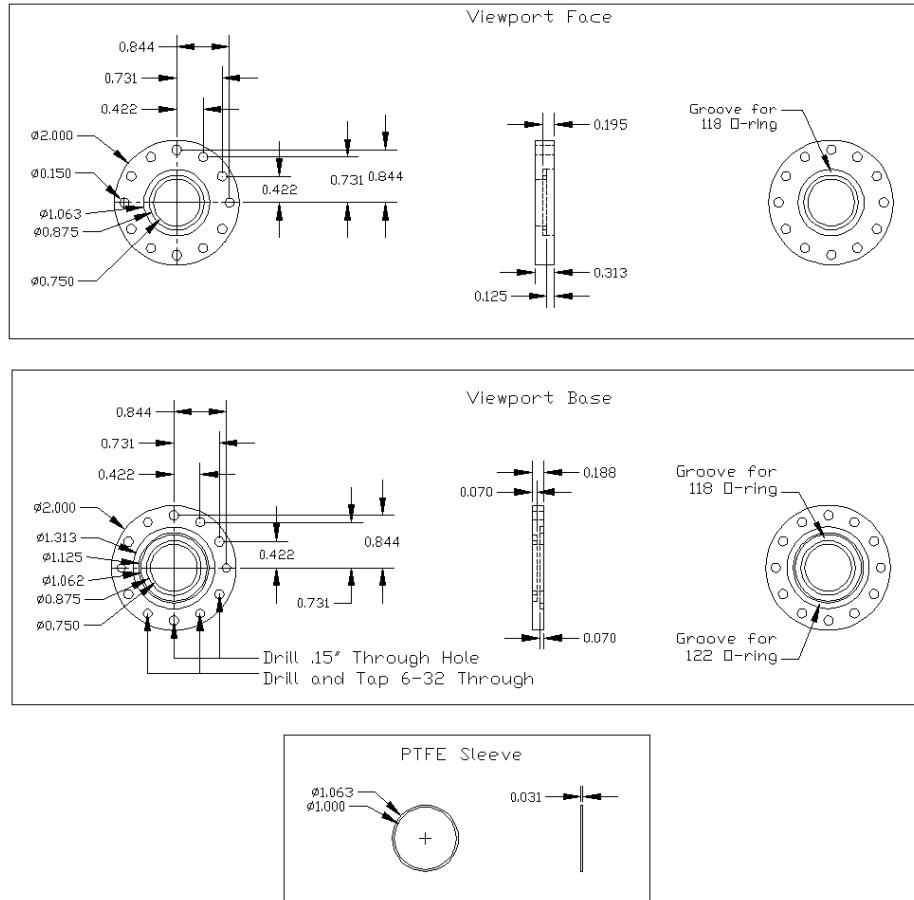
Construction drawings for the custom-designed high pressure optical viewport components.
